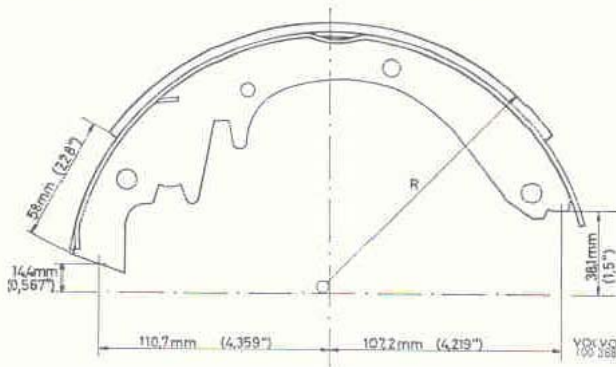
Adjusting measurements for front wheel rear brake shoes.
